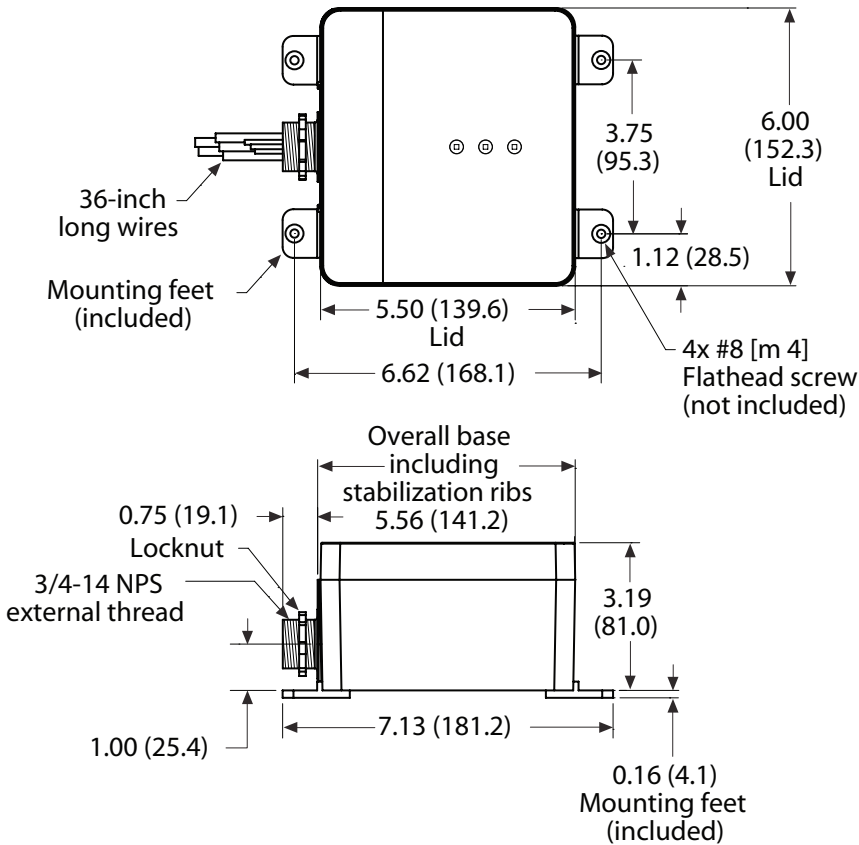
P1 enclosure, NEMA 4X with mounting feet dimensions, weight = 2.5 lb
